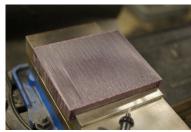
The original wax block is cut to obtain a 6x4x1 board. The board is located on the milling table.
